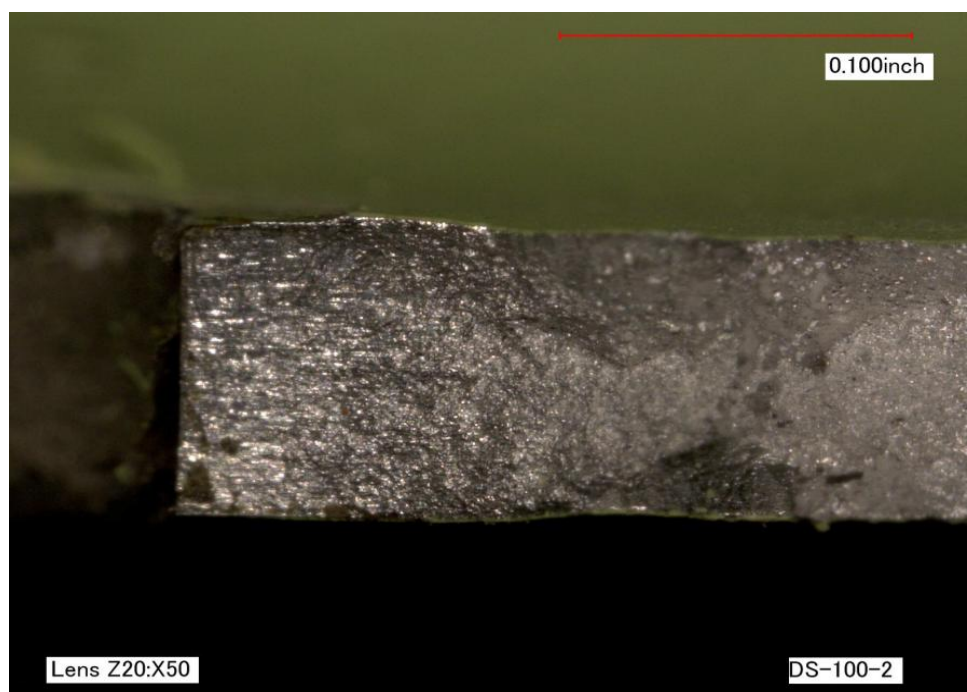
DS-100-2 Fatigue Fracture Surface (X50)
